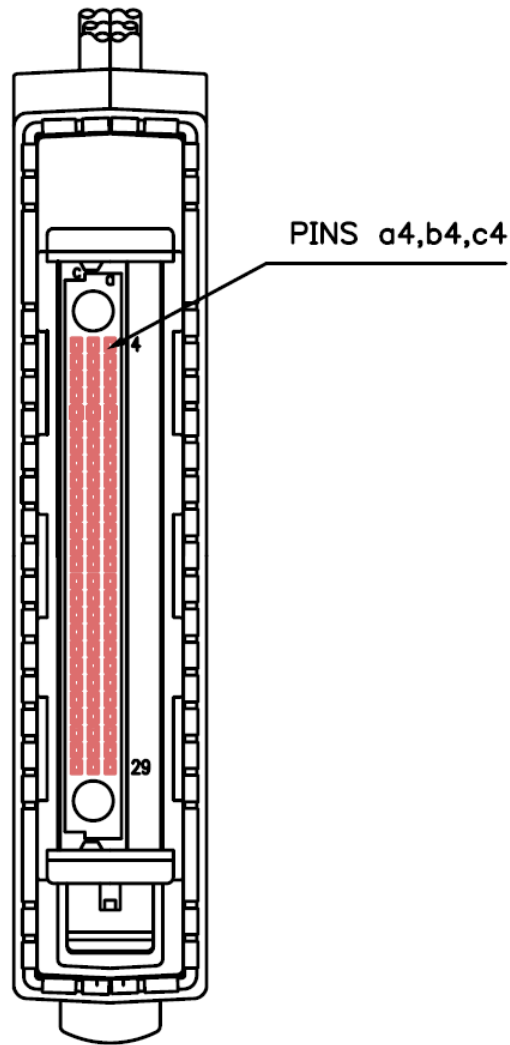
TC-305 Pin arrangement (view of outside of plug)
